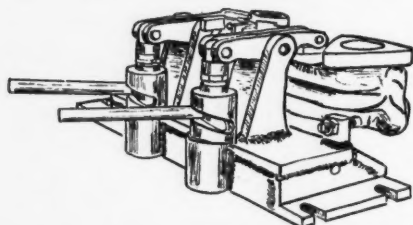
Another type of cam-action clamp, applied to a welded fixture.
